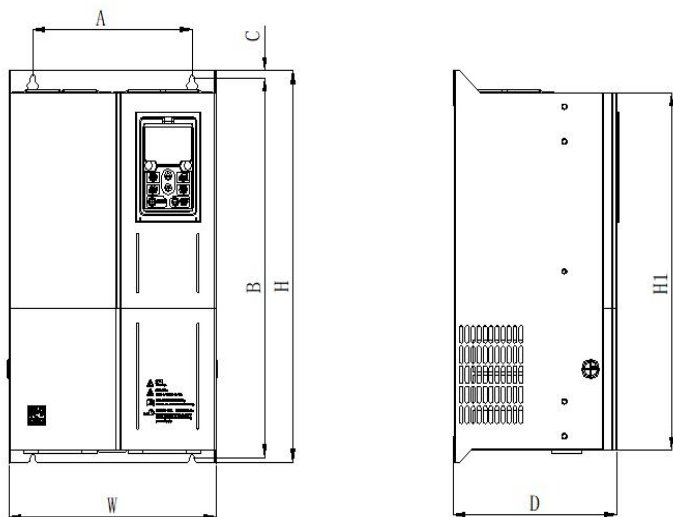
30~37 KW Sheet Metal Casing External Dimensions and Installation Dimensions Diagram
